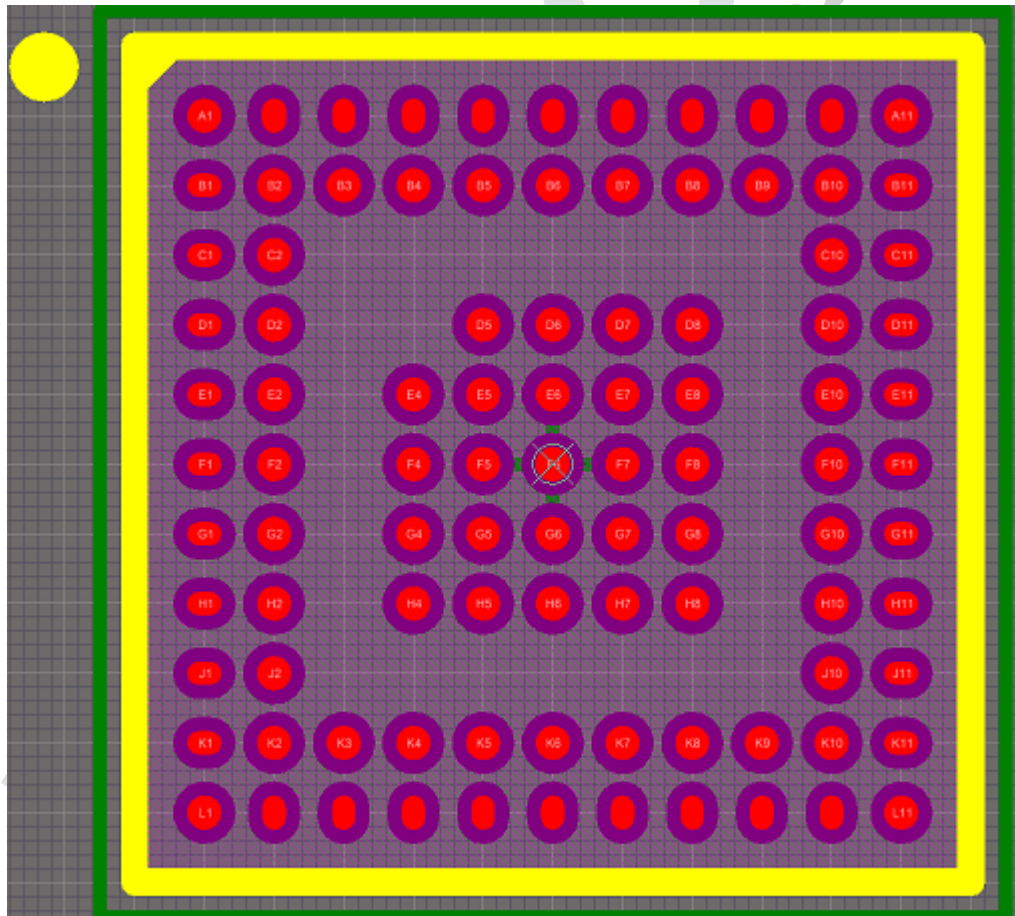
Top-View Alternate SN1804044ZBHR Footprint (Oval Pads)
